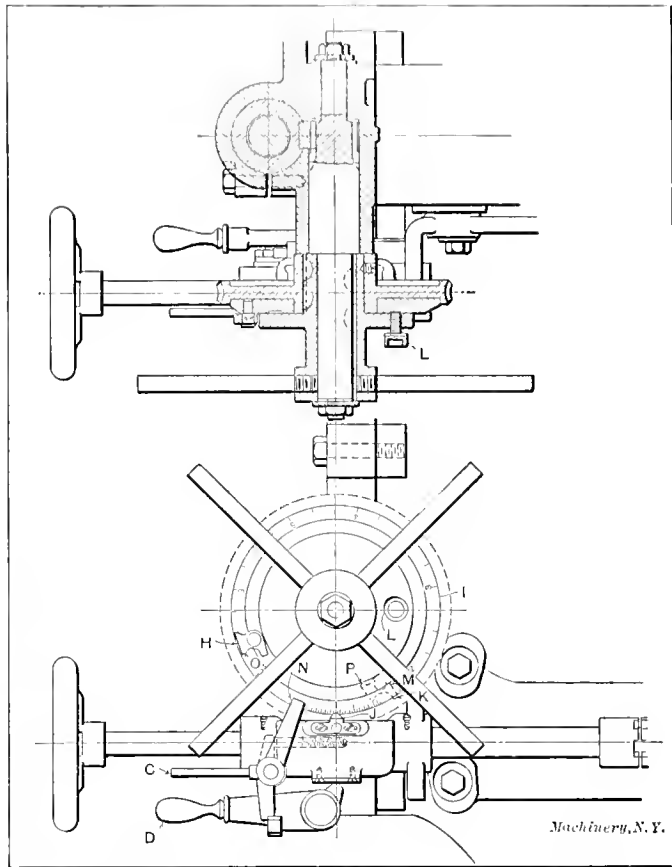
Section and Elevation showing the Automatic Feed-tripping Mechanism
